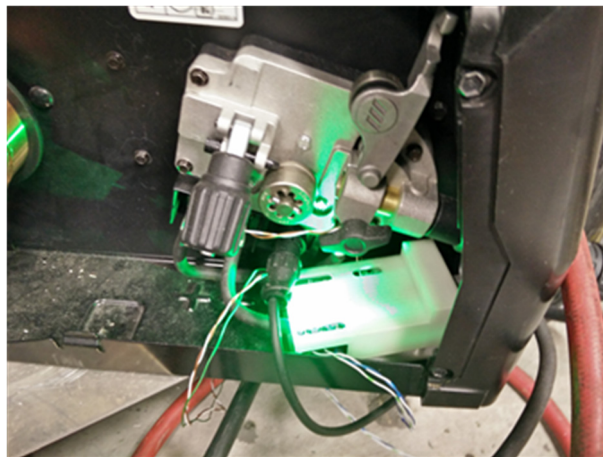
Installed current and voltage measurement circuit in the Millermatic 190 gas metal arc welder with 3-D printed cover (white).
